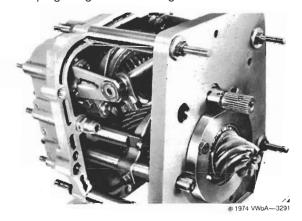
Clamping flange installed over pinion bearing on early transmission. Tighten bolts uniformly
